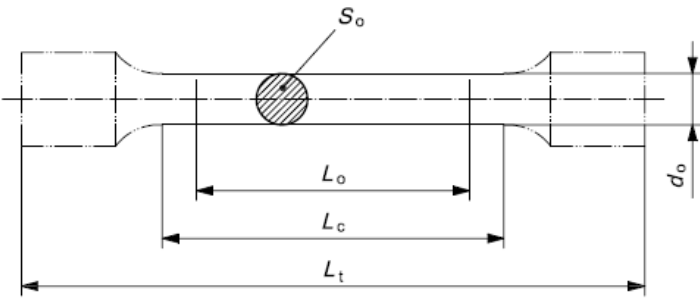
A formal tensile test specimen with a reduced section [12]
